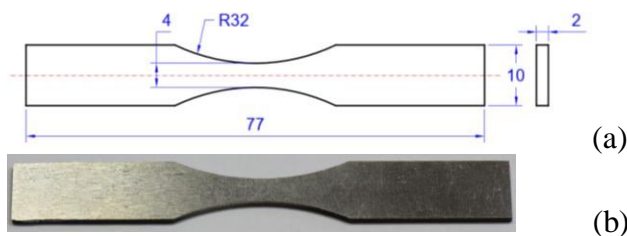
The specimen dimensions (a) and shape after manufacturing (b)
